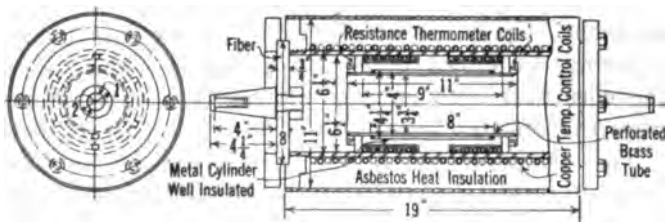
DIAGRAM SHOWING CONSTRUCTION AND DIMENSIONS OF TUBE
